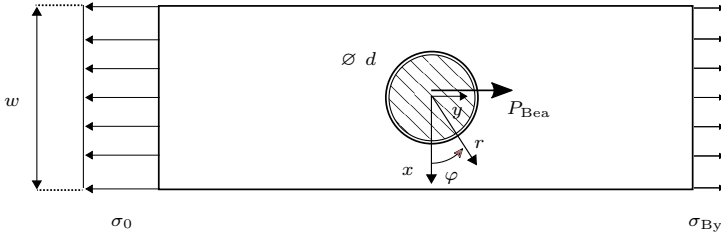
Finite dimensions bolted joint under combined bearing-bypass load.
